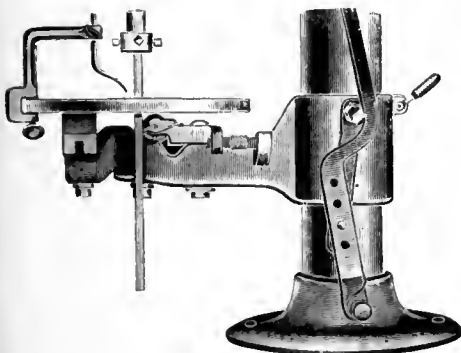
TABLE ELEVATED TO WORKING POSITION
